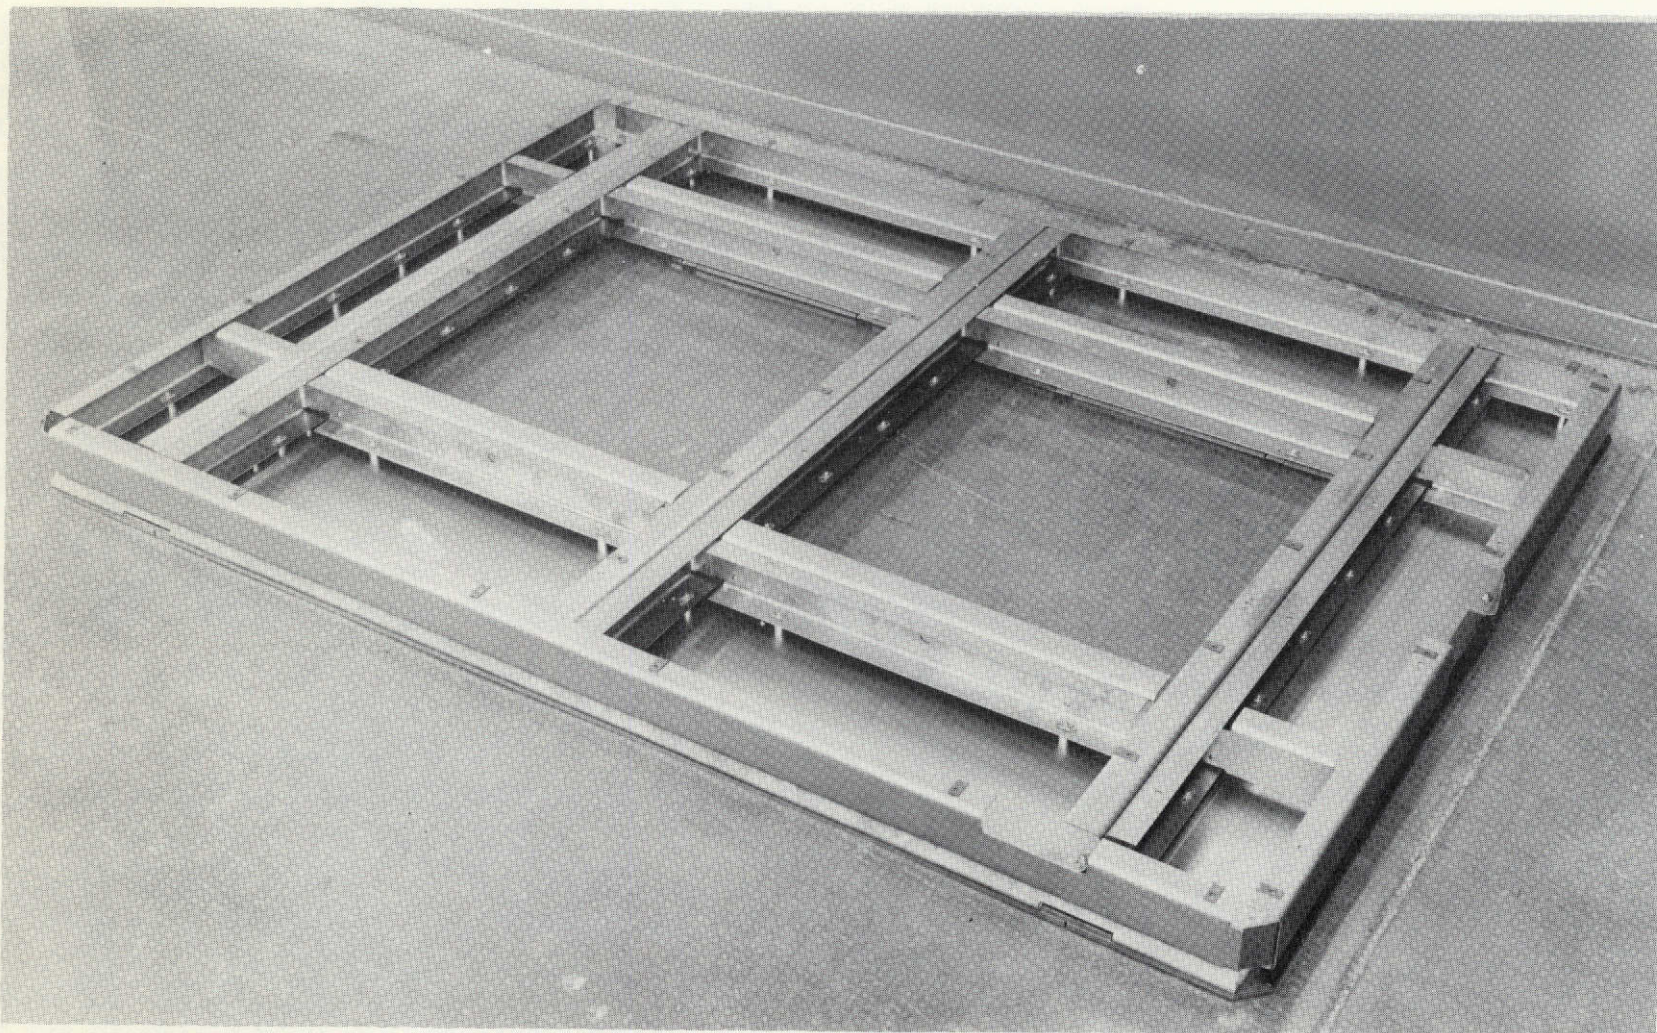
Bottom View of Titanium Substructure and Fairing for Wind Tunnel Test Assembly
